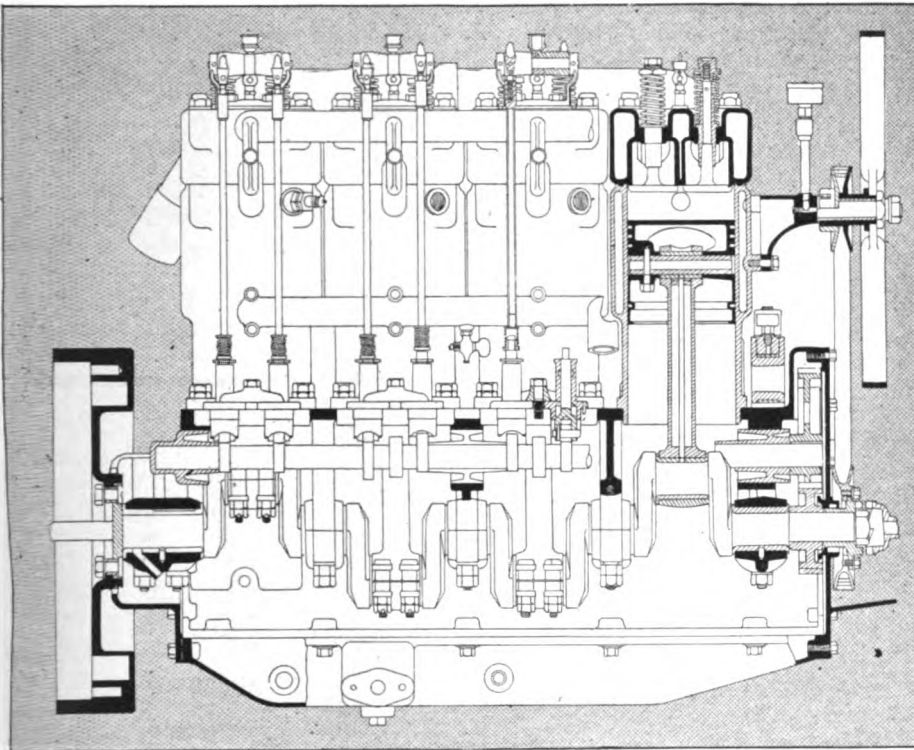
Elevation and part sectional view of Knox four-cylinder motor
